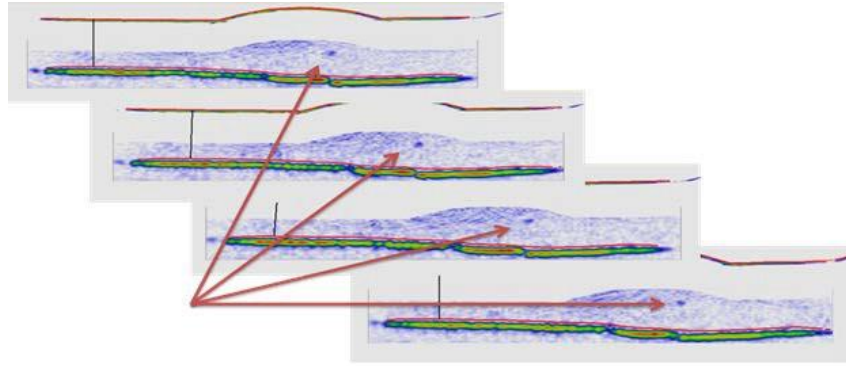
Weld inclusion identified in multiple adjacent frames.
